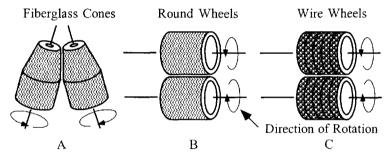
Typical Abrasive, Magnet Wire Strippers.
